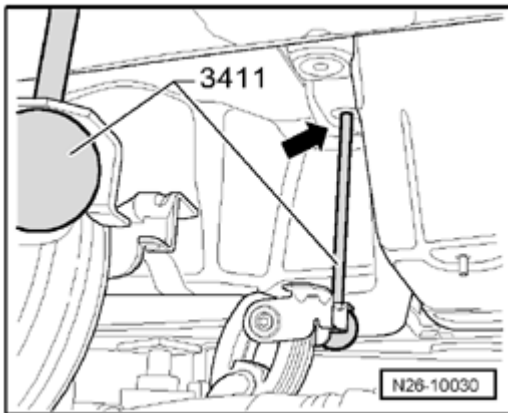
Exhaust System With Support Tool 3411 Supported At Mounting Of Exhaust Pipe Junction
